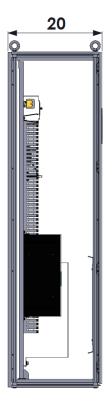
S3534BR E71 Cabinet Dimensional Outline
